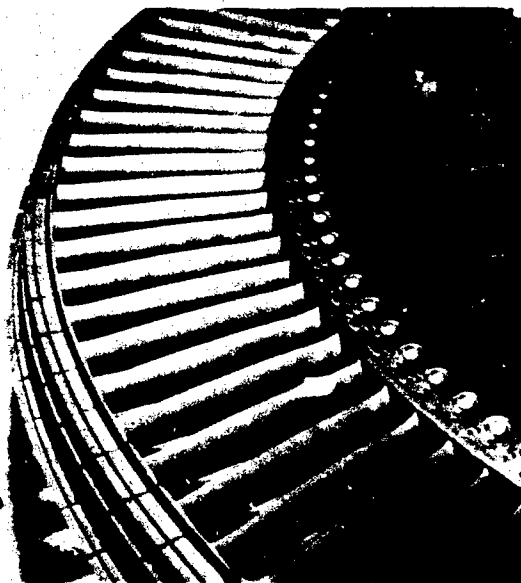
Build IV, First Rotor, Leading Edge Showing Cut-Back Inside Diameter Platforms and Tripwires (XPN-23417)
